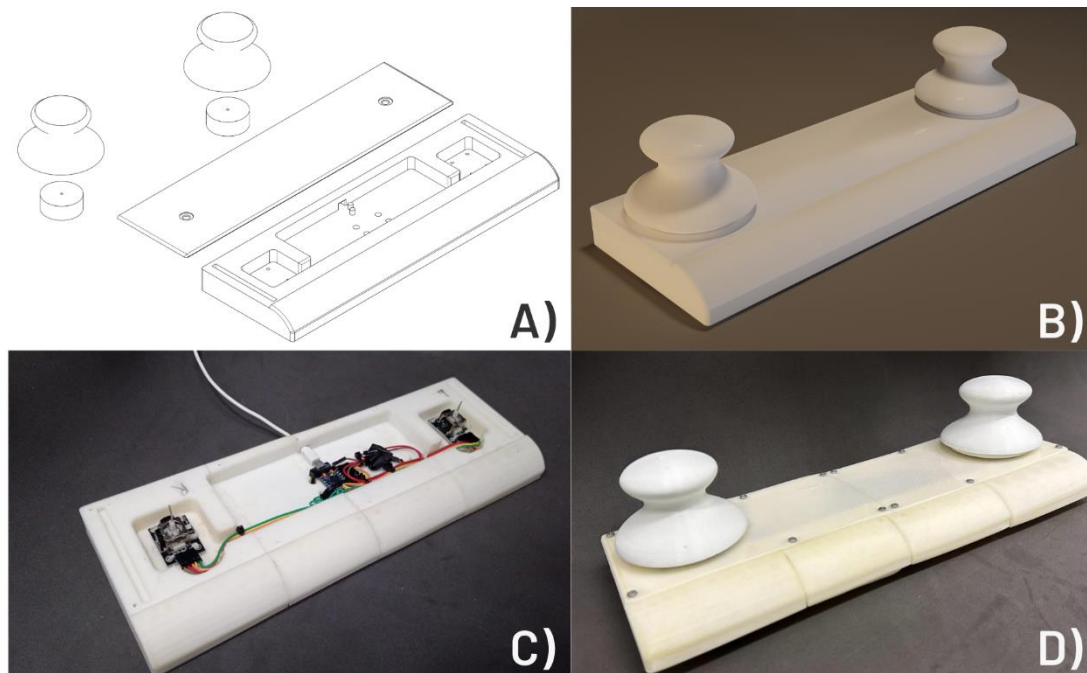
A) Peripheral prototyping stages: Exploded technical drawing of the physical structure of the assistive peripheral prototype. B) Rendered 3D model of the assembled prototype body. C) Manufactured physical prototype of the assistive peripheral with sensitive internal electronics. D) Assembled and ready-to-use assistive peripheral.
